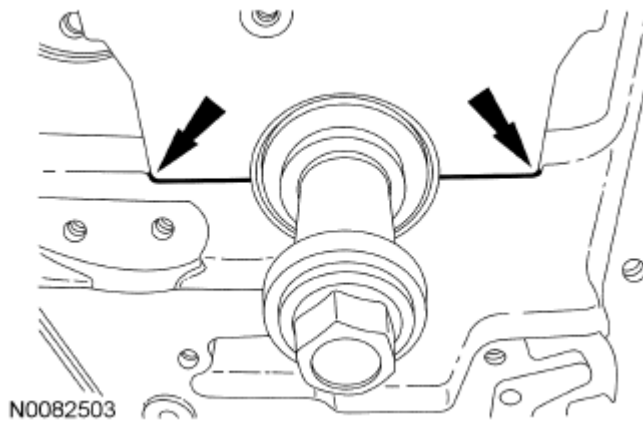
Locating Main Bearing Beam Side Fit Surfaces
